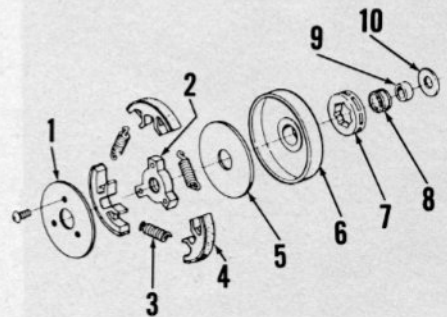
Exploded view of clutch assembly used on late Model 360 series.
